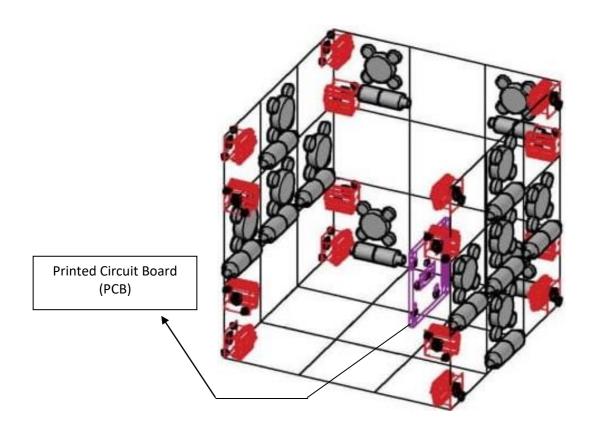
65 PRINTED CIRCUIT BOARD (PCB) CONFIGURATION OF THE WIDESAT
